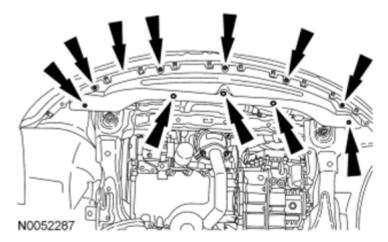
Locating Secondary Latches Courtesy of FORD MOTOR CO.
